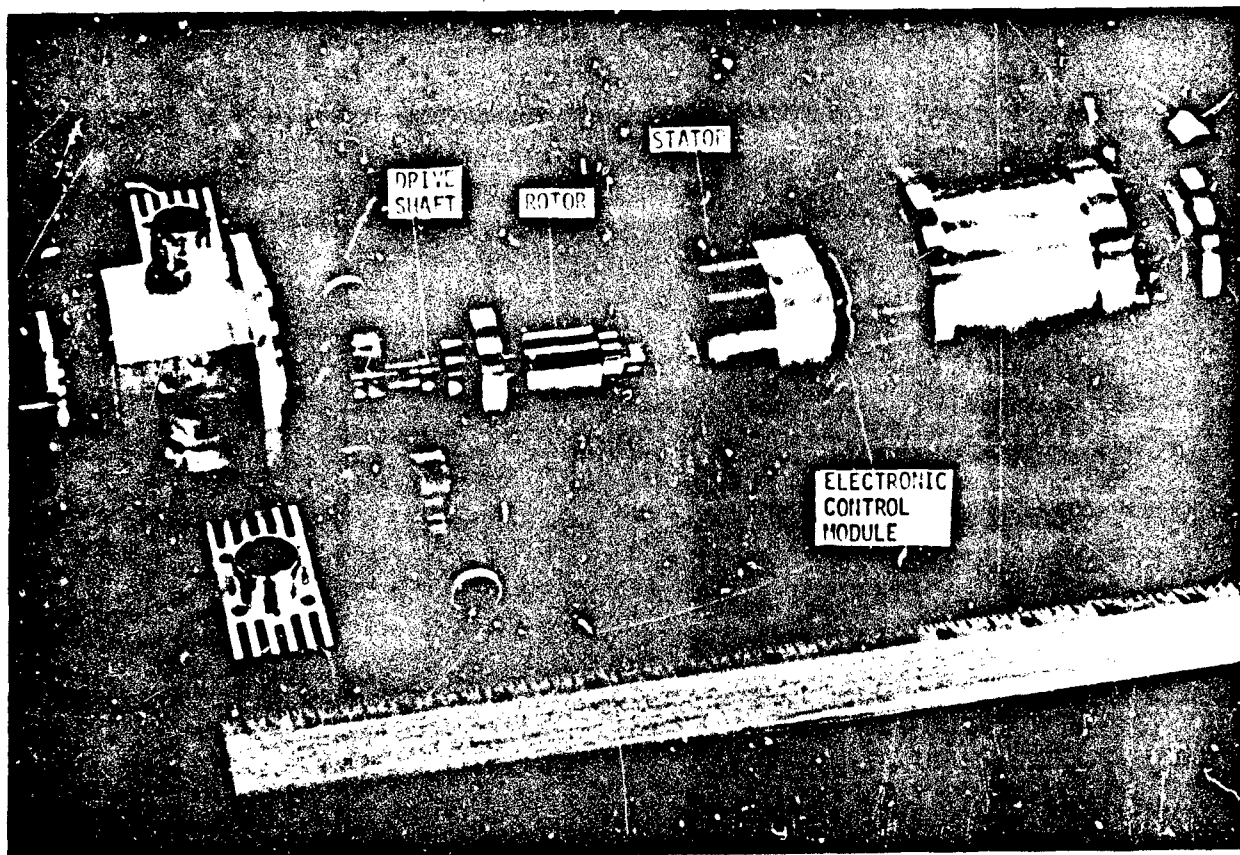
CRYOGENIC COOLER-EXPLODED PARTS VIEW
